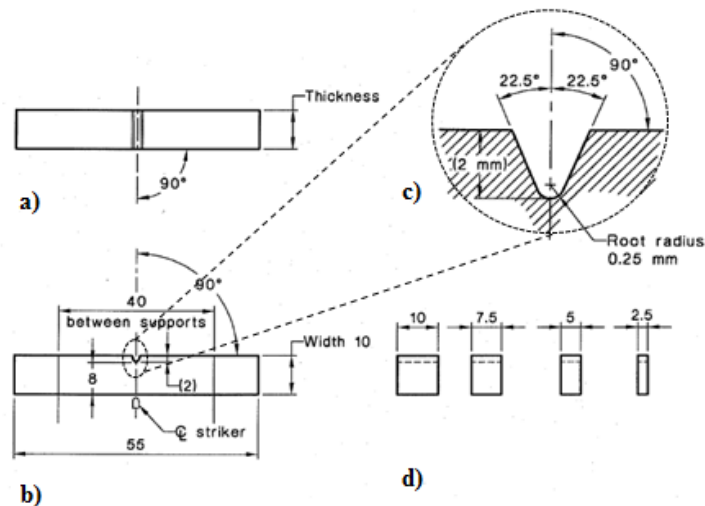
CVN specimen: (a) top view; (b) side view; (c) Notch detail; (d) Subsidiary specimens
